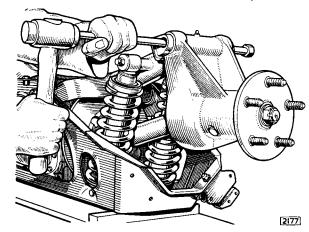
Drifting out the wishbone outer fulcrum shaft
